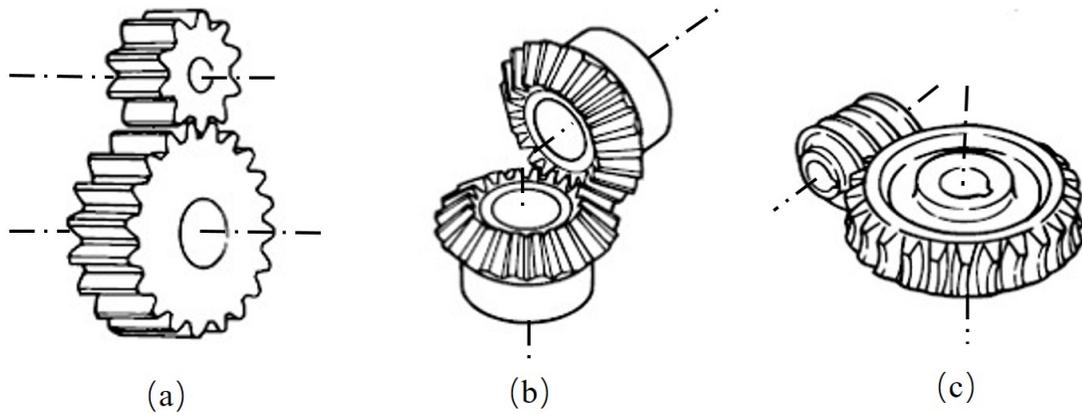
Three types of gear systems: (a) parallel, (b) intersecting, (c) non-intersecting
